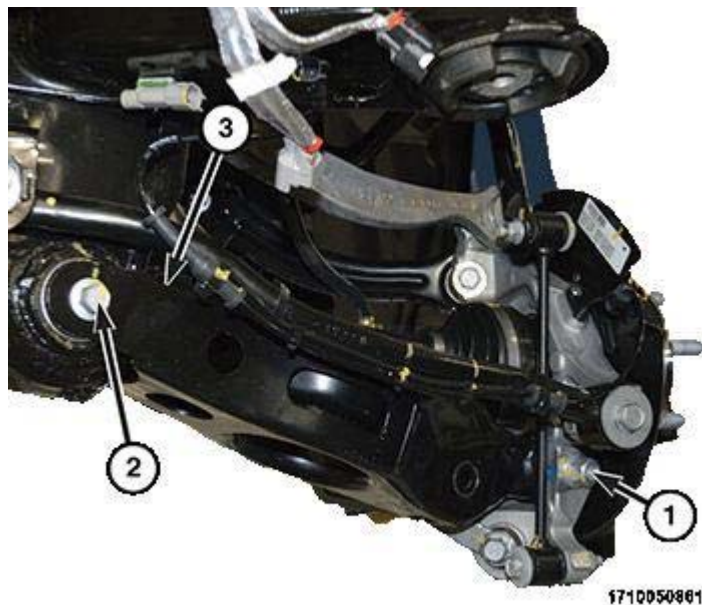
Spring Link To Knuckle Bolt & Spring Link To Crossmember Bolt
